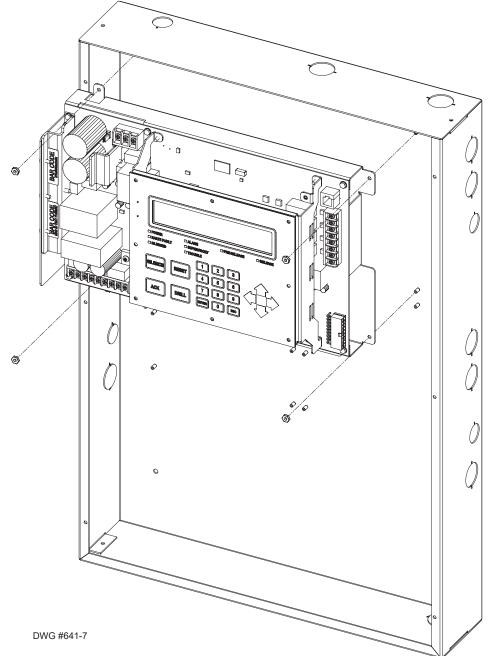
AFC-1000 Cabinet Showing Circuit Board Assembly
